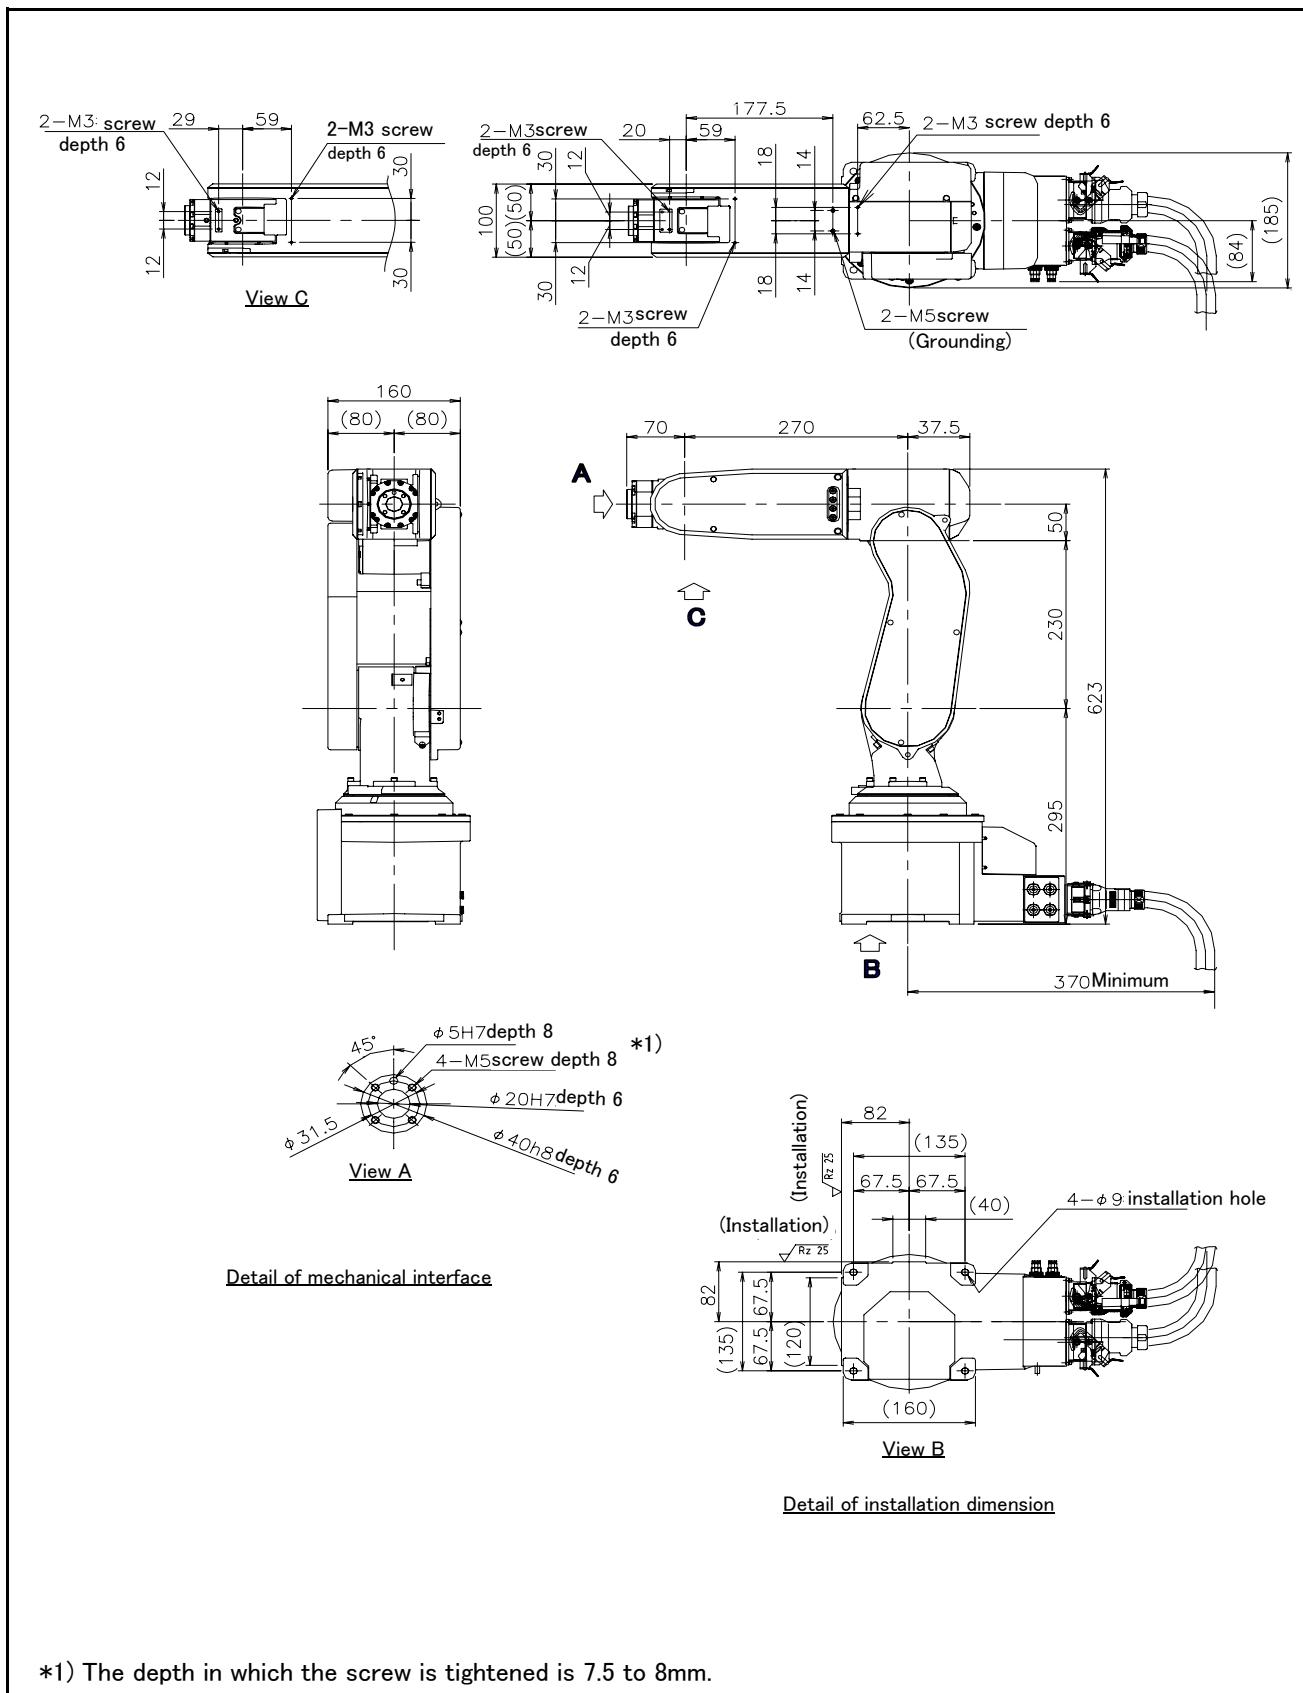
Outside dimensions (CE marking S15 specification)
